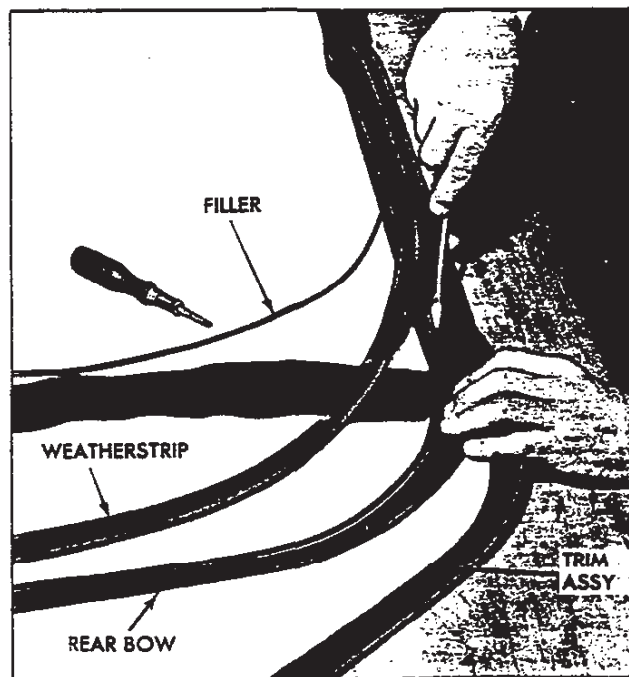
Installing Trim and Weatherstrip to Rear Bow
